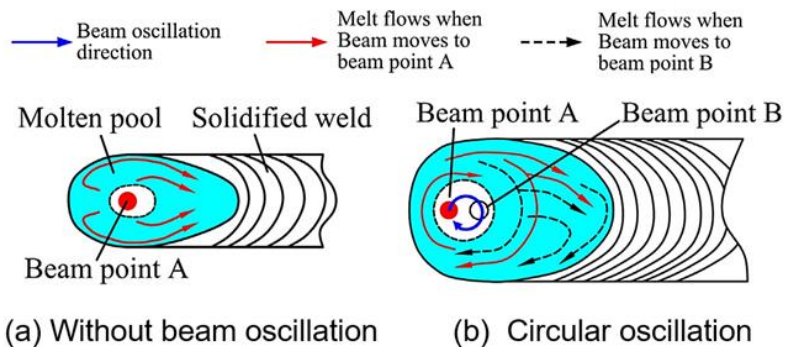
Bead shape of line welding and wobbling welding
